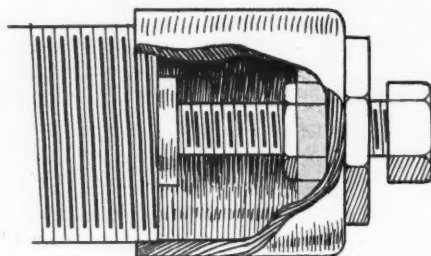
Showing how a hub cap may be used as part of a wheel puller
